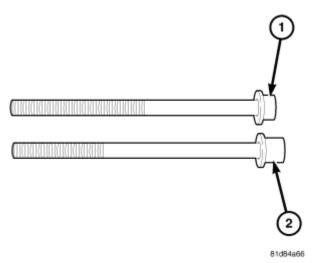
Cylinder Head Bolt Identification Courtesy of CHRYSLER LLC
